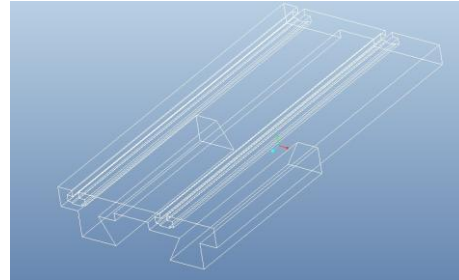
Wireframe Model of CNC Lathe Cross Slide
